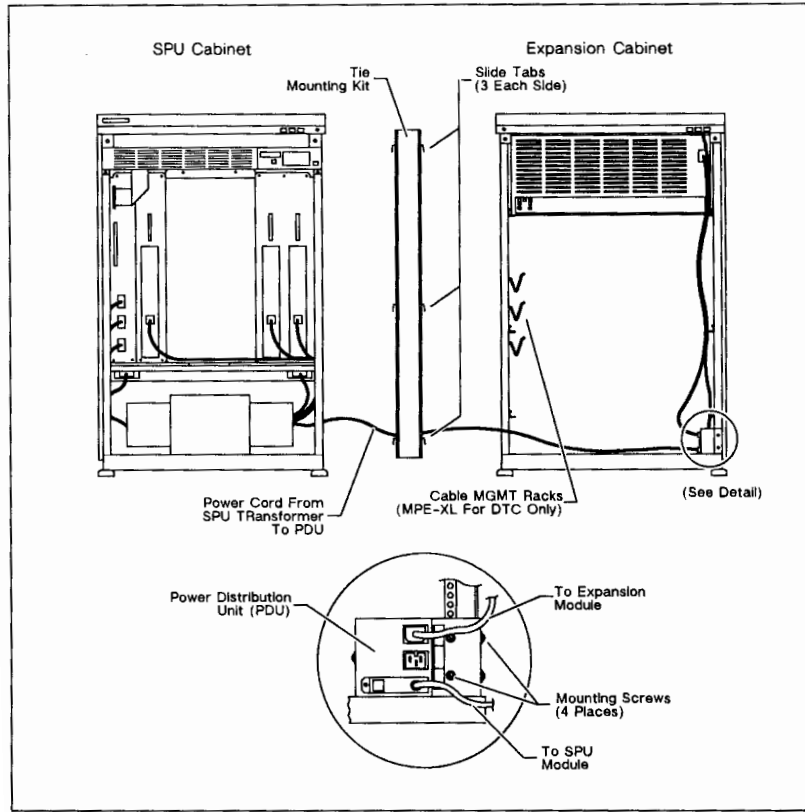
Cabinet, Front View (Door and Card Cage Covers Removed)
